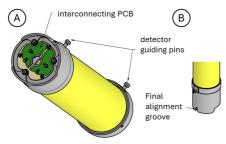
(A) Detector assembly; (B) Detector head zoom.
